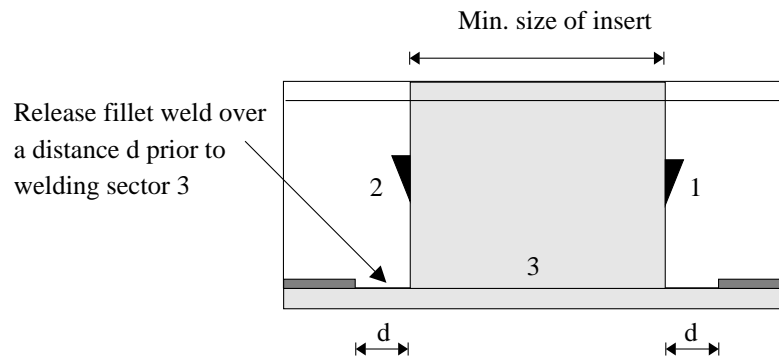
Welding sequence for inserts of stiffeners
